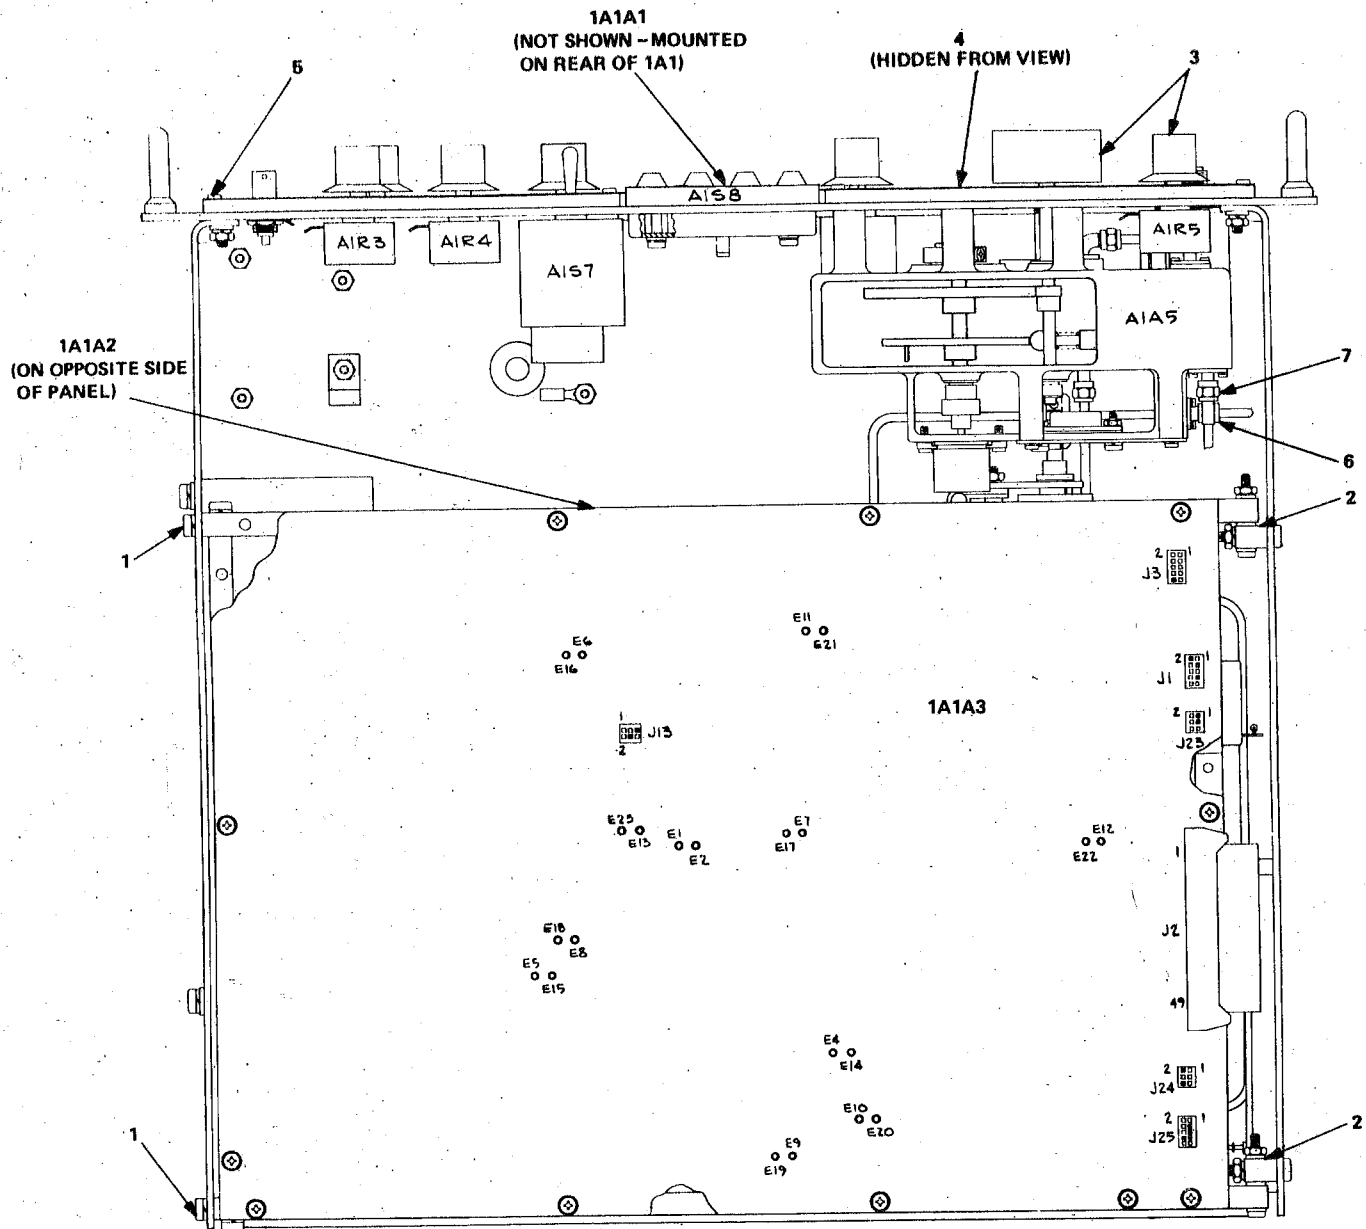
Electronics Assembly 1A1 Showing Hinged Panel and Components
